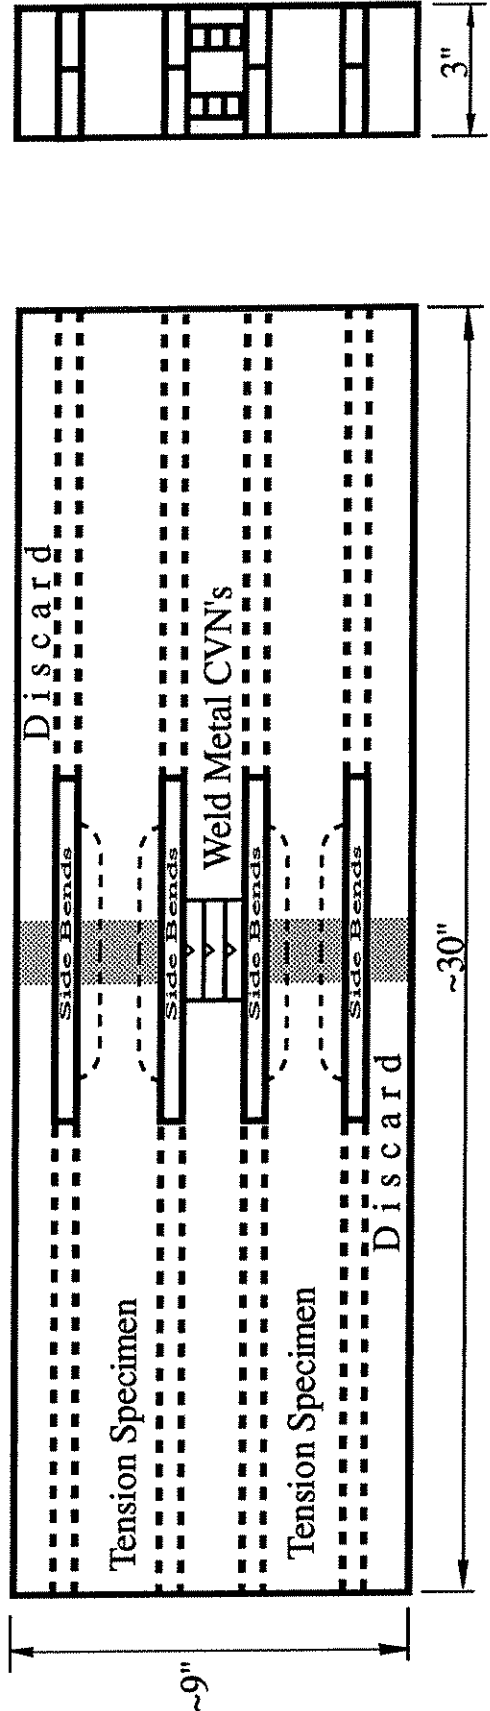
W14 x 730 Web Splice Test Specimen Layout
